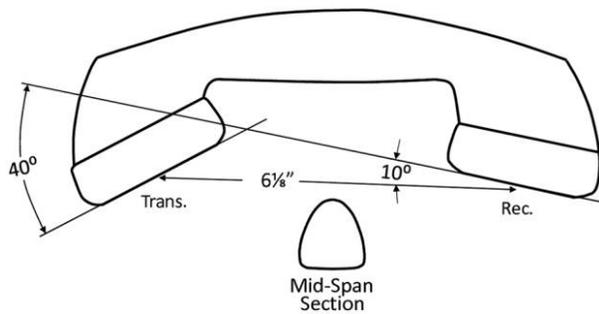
Outlines and modal dimensions, F-type handset. (Ralph Meyer.)
